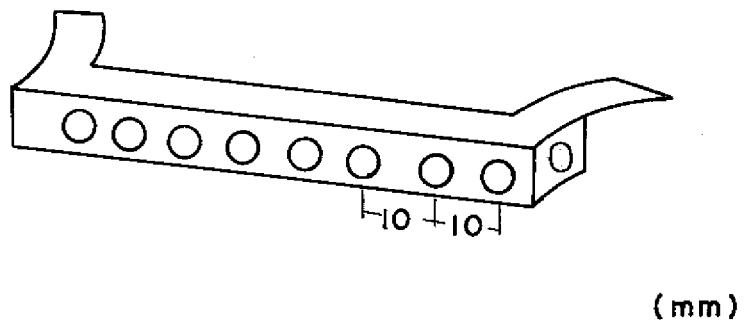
Experimental technique for measurement at the inside of pressure and calandria tube
